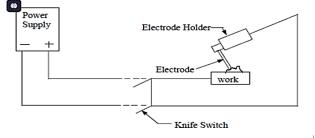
A typical underwater wet welding diagram Power source used: DC[11]
